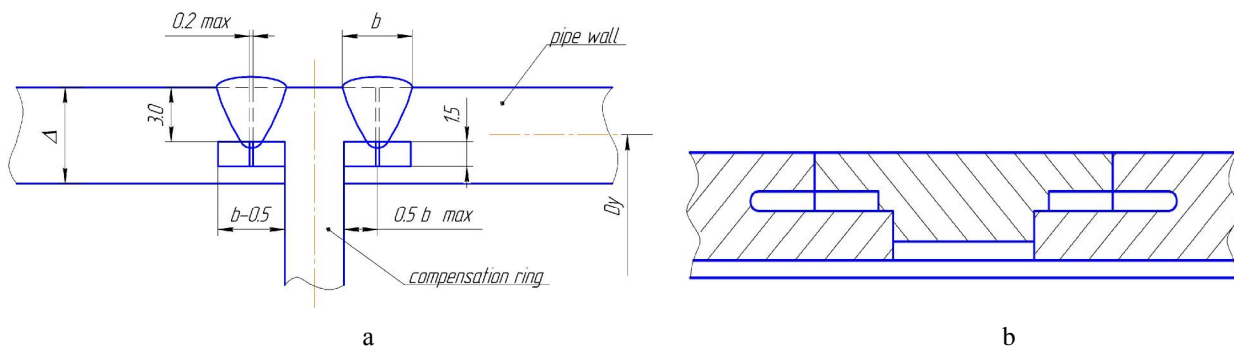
Working form of assembly and welding of pipes: a – through the compensation ring; b – when working out the modes on planar samples
